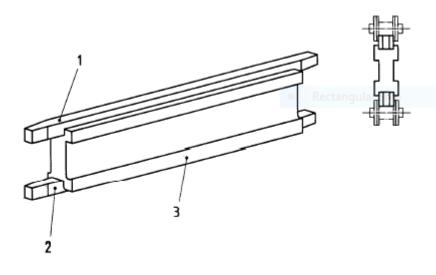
STRAIGHTEDGE HOLDER ASSEMBLY
